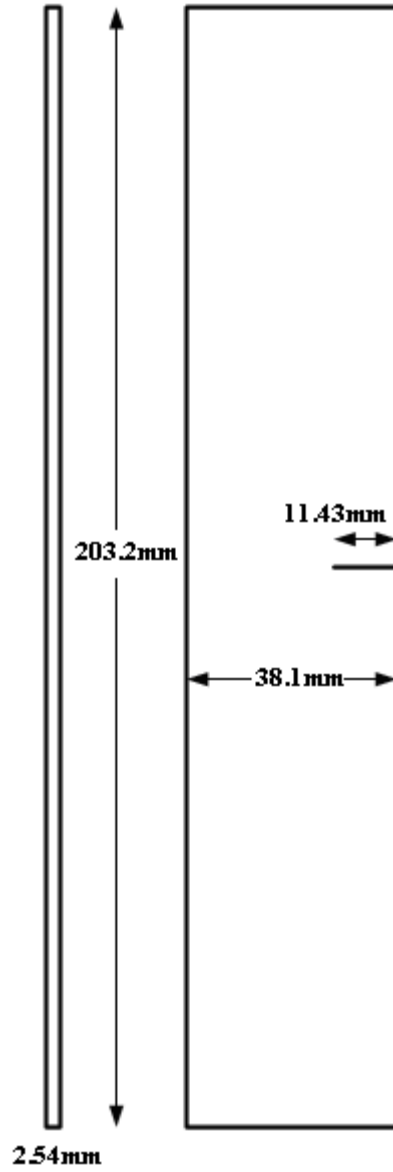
Single Edge Notch Tension Specimen with Dimensions
